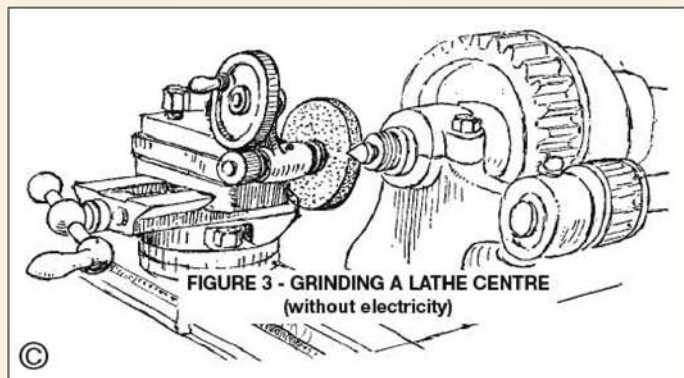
GRINDING A LATHE CENTRE (without electricity)
